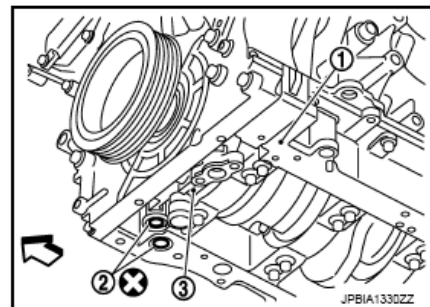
Identifying Lower Cylinder Block And Oil Pump O-Rings
